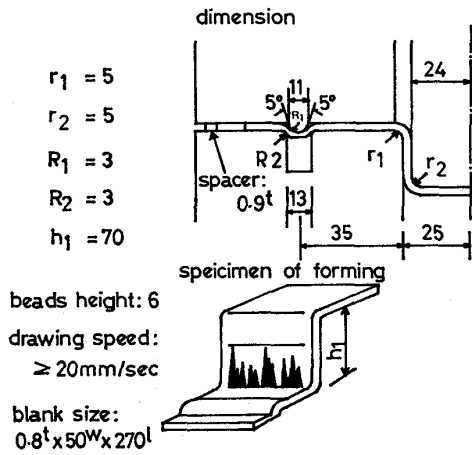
Tool shape of hat channel drawing with beads and test condition.
